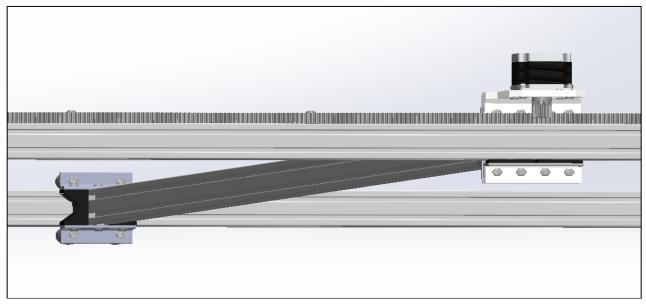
Model of a primary gantry motion arm mounted to 80/20 frame extrusions.
